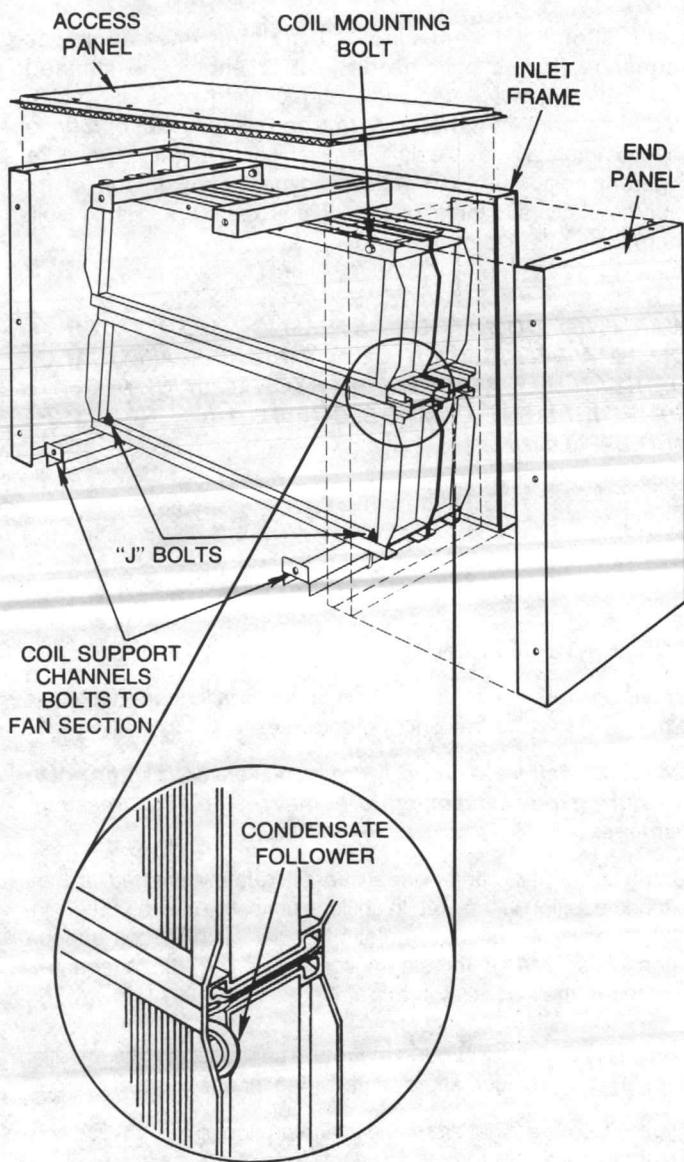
Draw-Thru Coil Section Details with View of Condensate Follower
